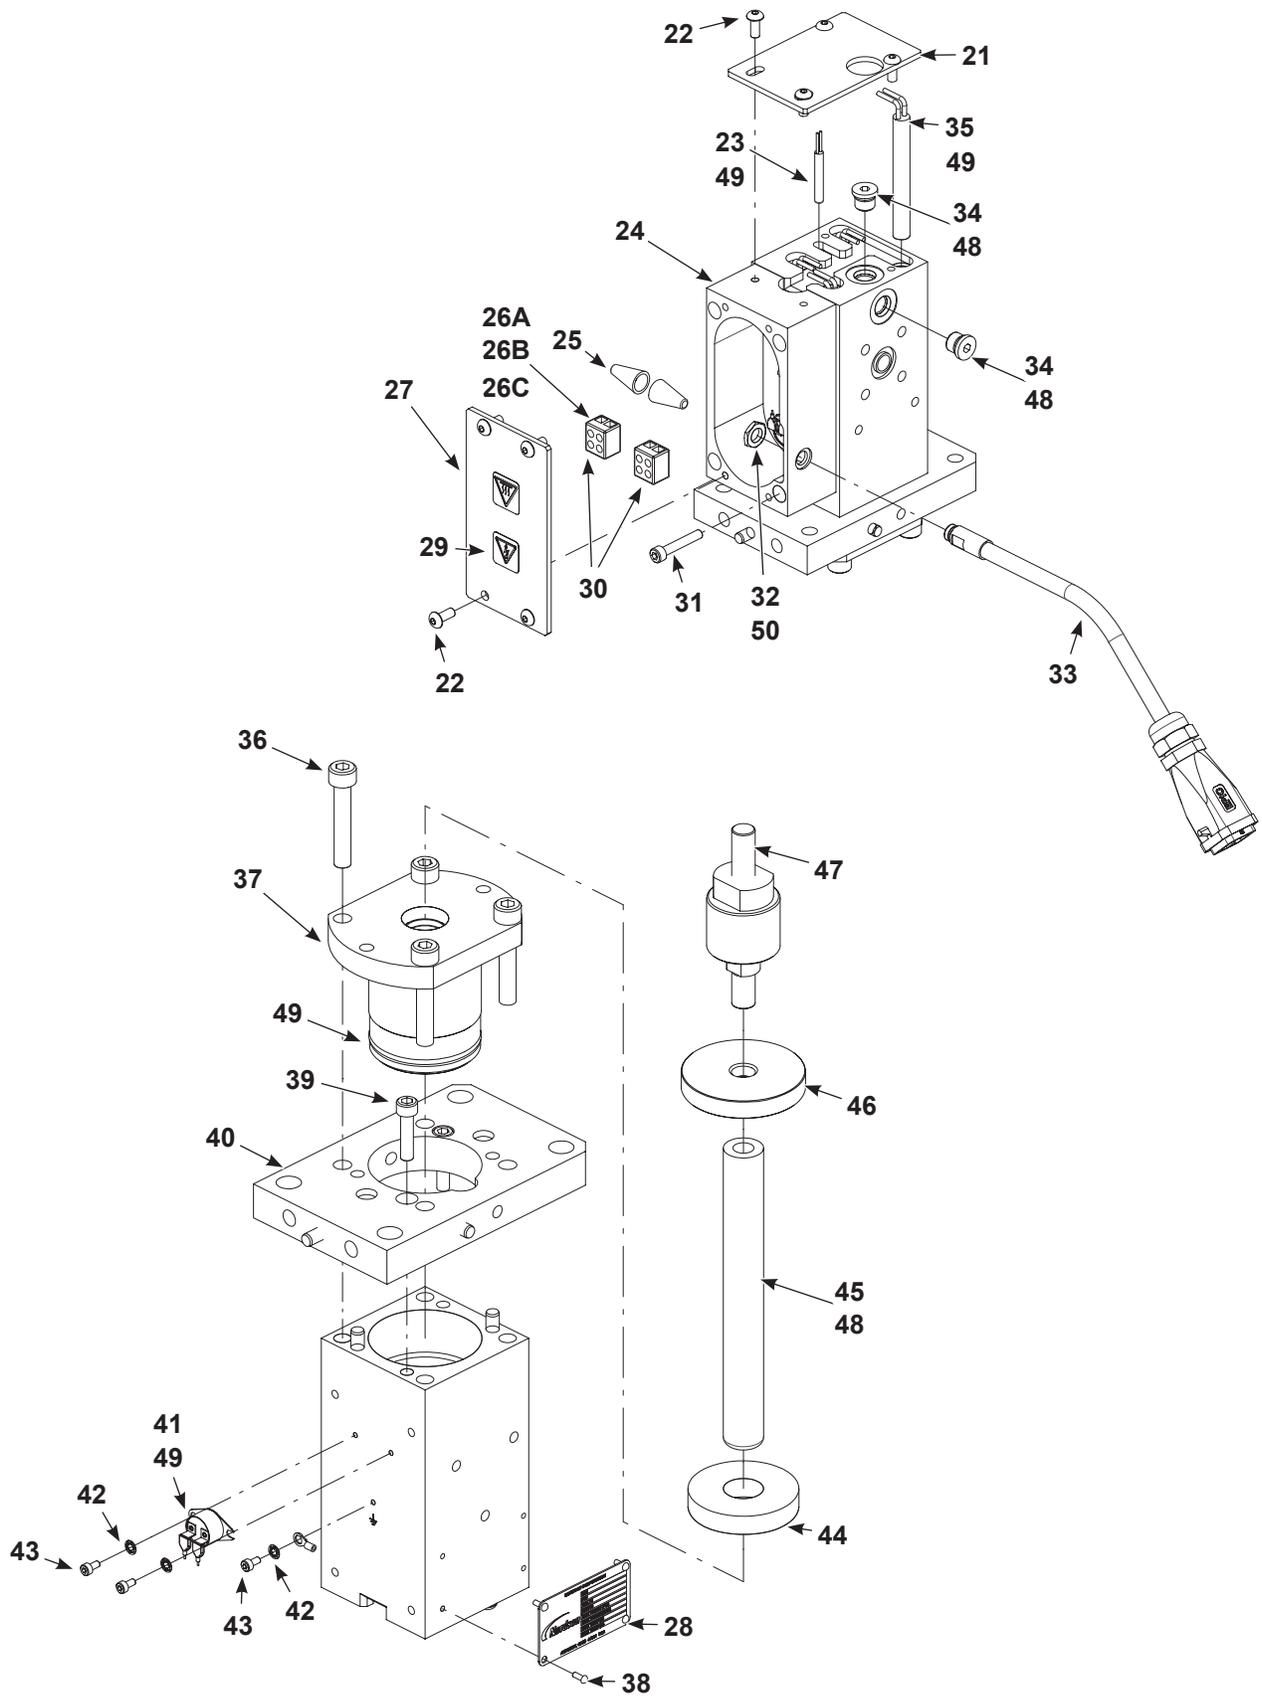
S165 120 Volt Heated Dispenser Parts (Continued)
